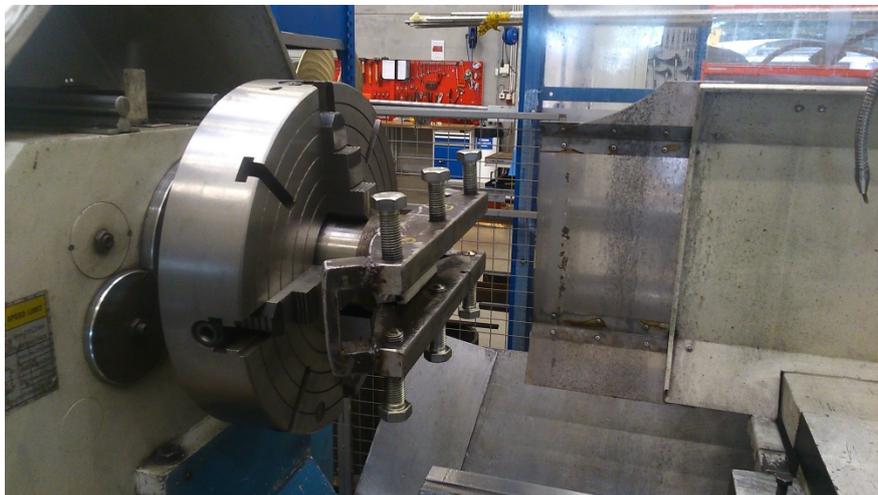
The prototype handle for the processing of propellers wing thruster is mounted in the lathe
